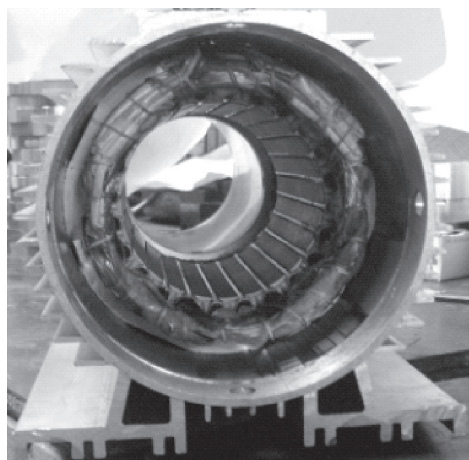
Module RM – stator ShR 90X-8M after mounting in the housing of the rotary-linear motor
